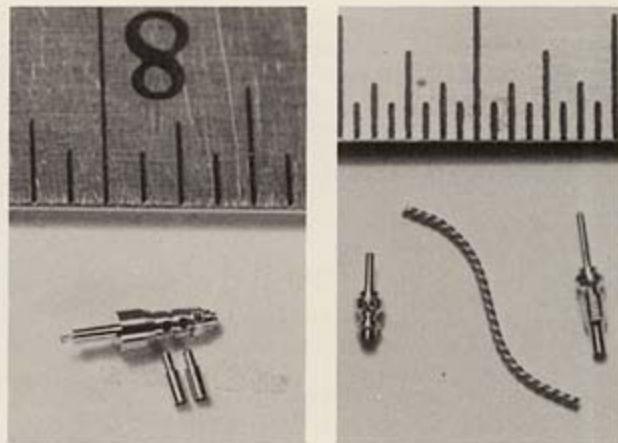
Paul turned these parts for the Suzuki brake master cylinder from metal rod. Fig. 7. The couplers for the anti-dive mechanism are turned metal; the hose is twisted wire.
